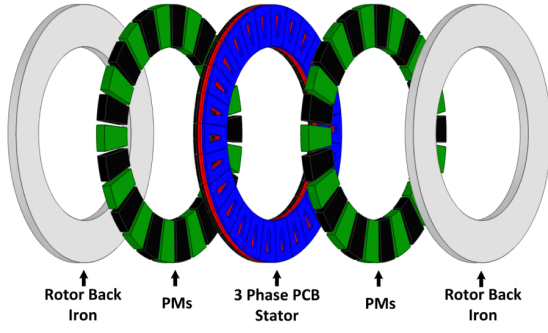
The exploded view of the introduced double-rotor coreless AFPM machine with modular PCB stator, where each is dedicated to one phase. By stacking and mechanically shifting the PCB stators, multi-phase machines can be formed.
